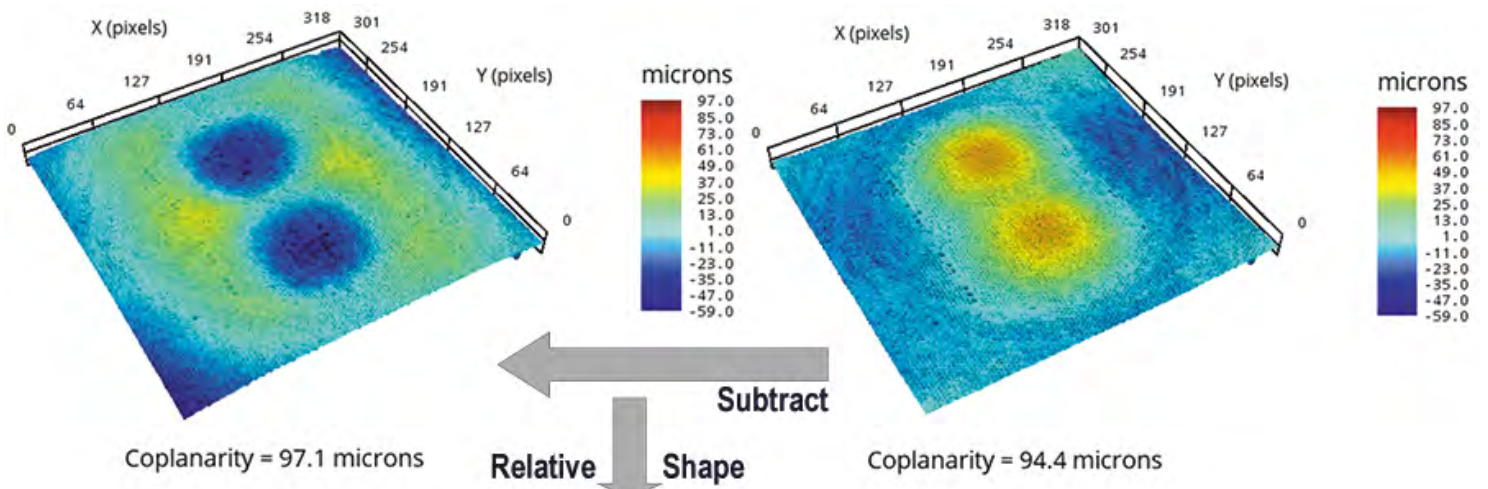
Solder liquidus (220°C) interface analysis between larger BGA 4 and PCB 1 – ROI 2.
